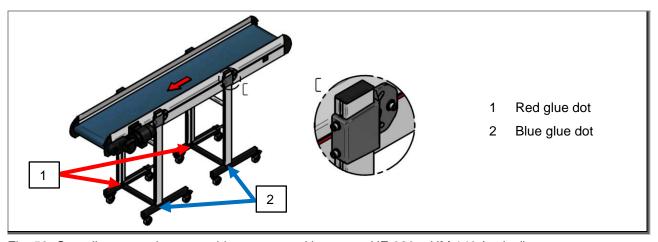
Overall construction assembly conveyor with support HE 020 – HM 140 (typical)
